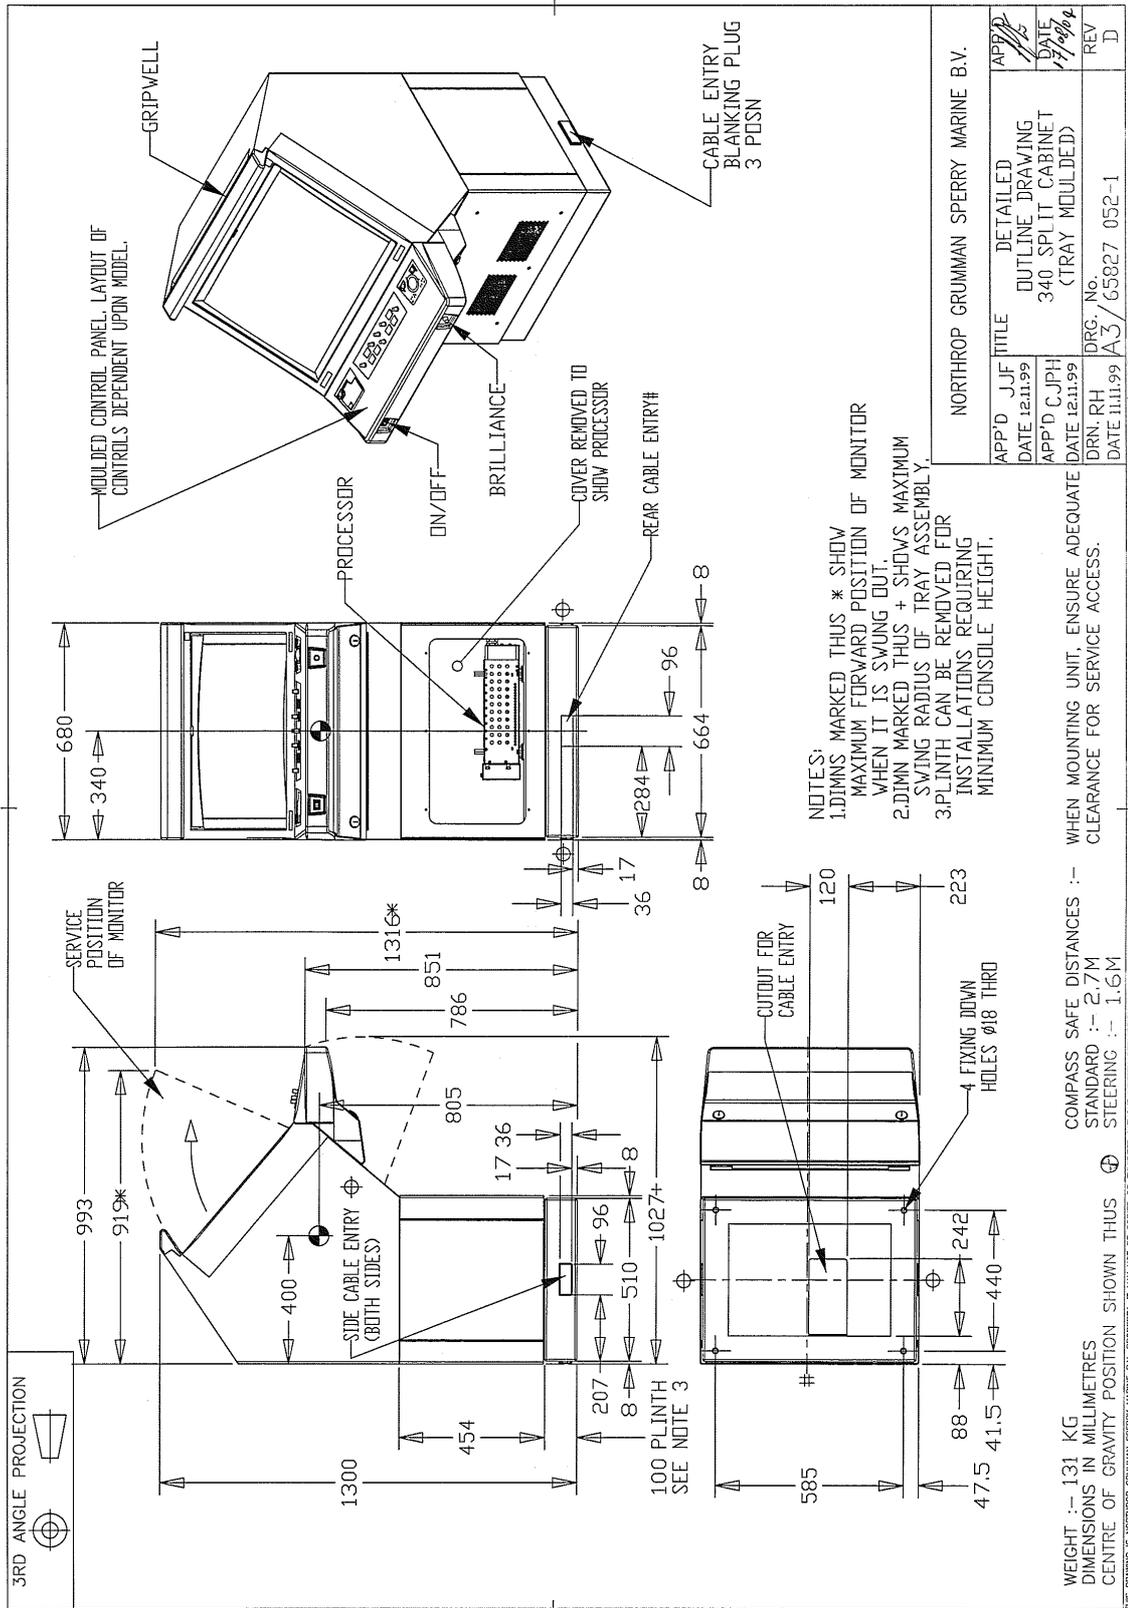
340 Deck Mounted Display Unit (CRT with moulded tray) Outline Drawing
